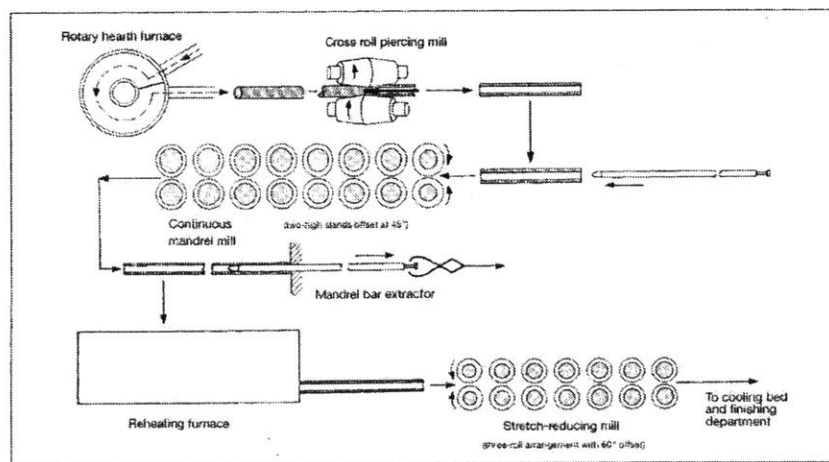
Schematic representation of the continuous mandrel mill manufacturing process [64].
